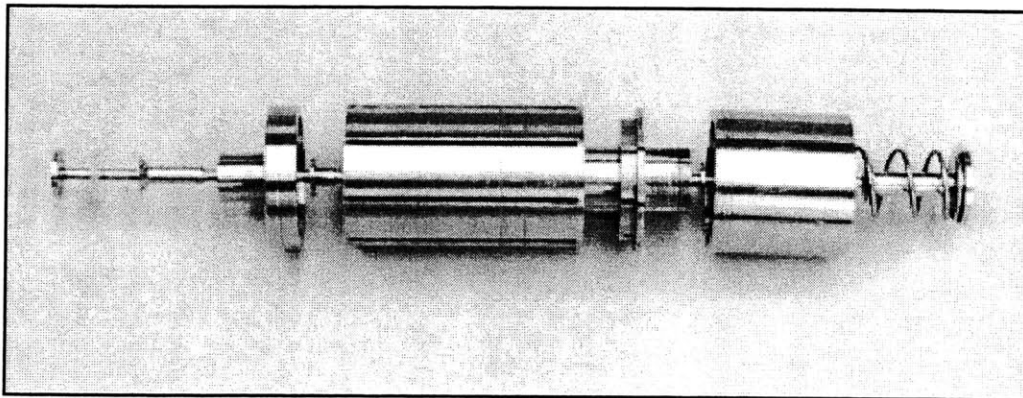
Depiction of components of the valve. Right is the housing assembly; left includes the valve assembly
